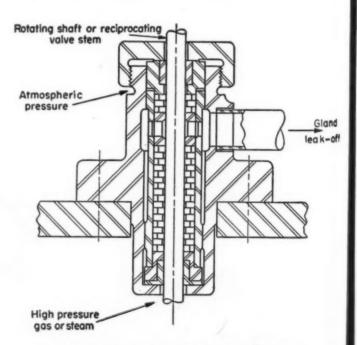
Above—Multiple bushing or floating-ring seal assembly. Reduces clearance limitations inherent in long bushings
